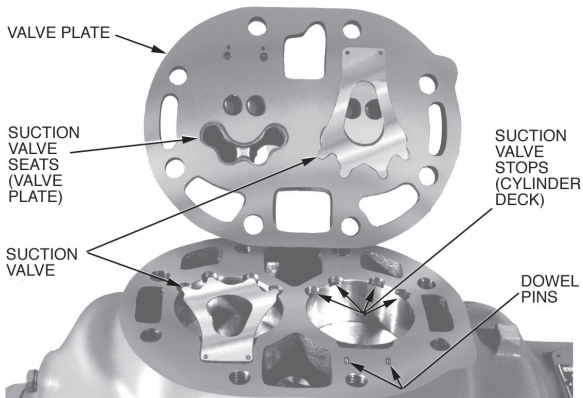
Valve Plate Removed (06E Refrigeration Valve Plate Shown)
